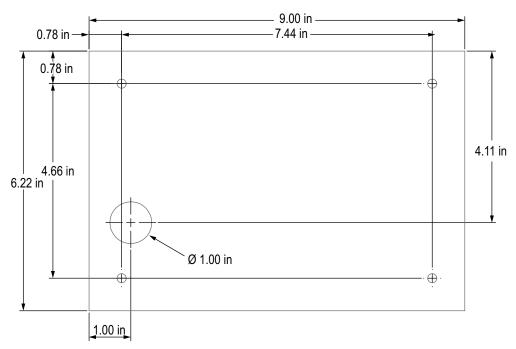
7 in Touch-Only Panel Mount Dimensions
